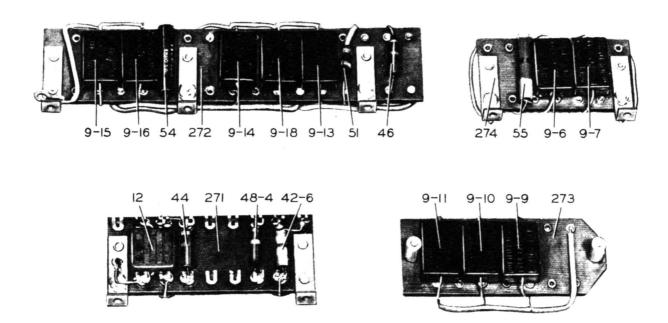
RADIO RECEIVER BC-224-B: RESISTOR BOARDS, VIEW B
